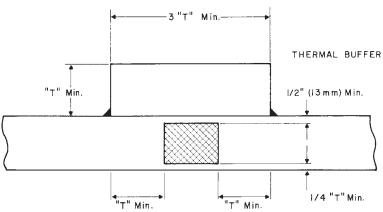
Thermal Buffer Pads—Longitudinal Axis and Gage Length of Test Specimen Must be Within Cross-Hatched Zone
